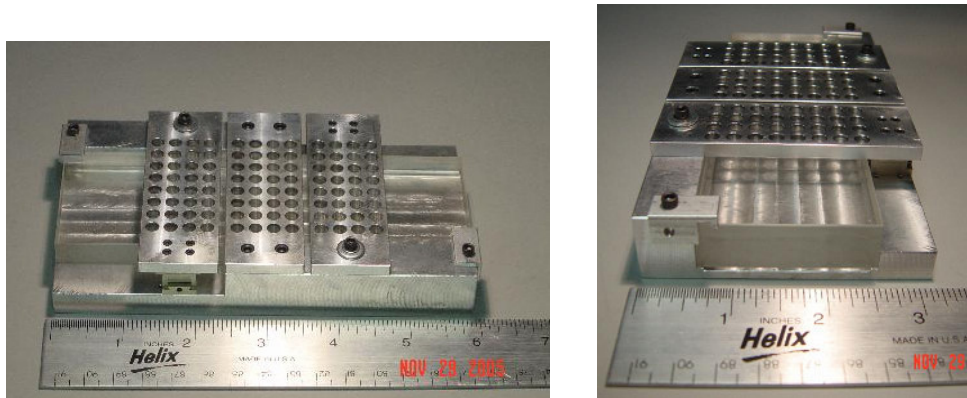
Photographs of the fabricated metal case for the optical backplane.
